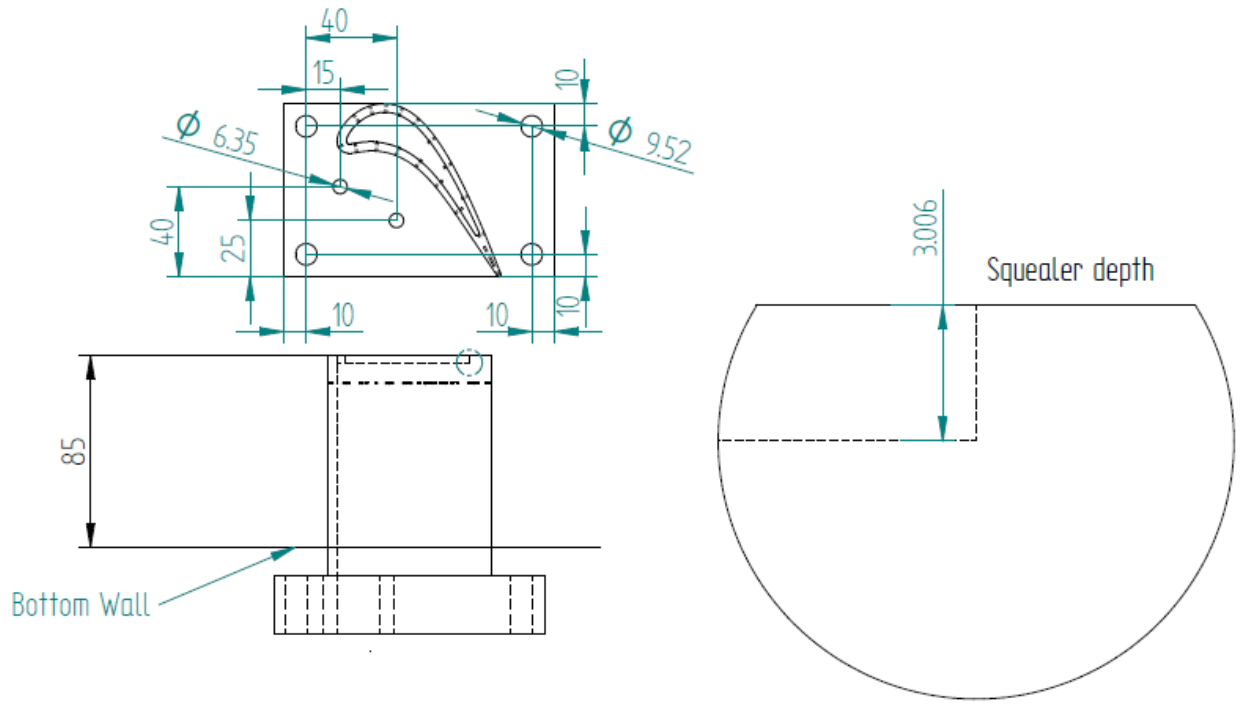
Mounting hole arrangement, Blade span, and squealer recess depth as shown on the 90% span pressure measurement turbine blade. These dimensions are the same for every blade presented in this experiment. Dimensions are in mm.
